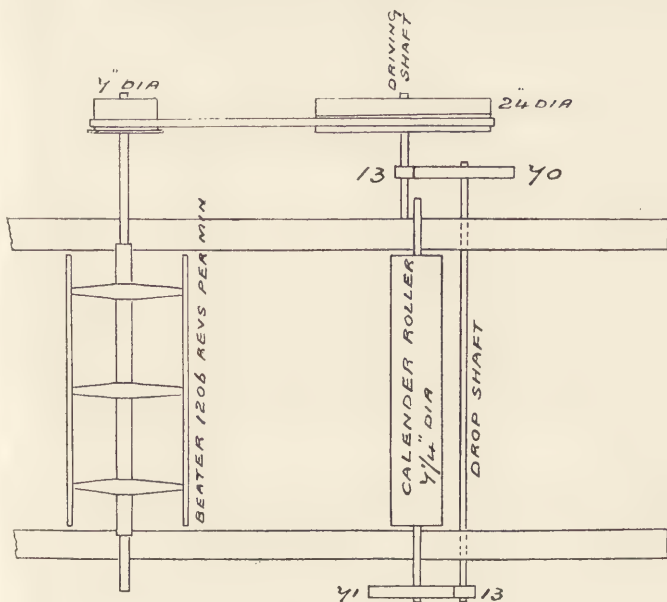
PLAN SHOWING BEATER, CALENDER ROLLER, DROP SHAFT, AND DRIVING SHAFT.
